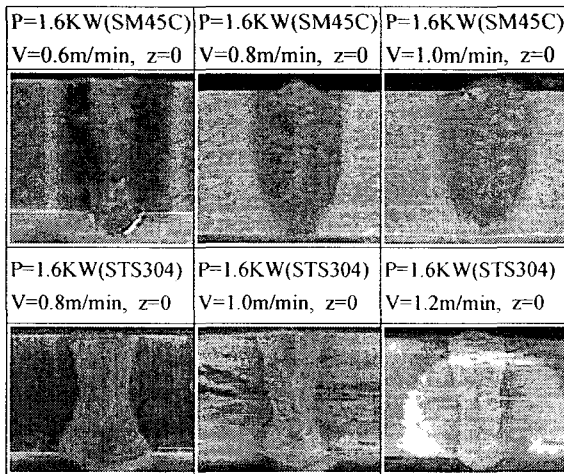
Welding Cross-section according to the laser travel speed.
